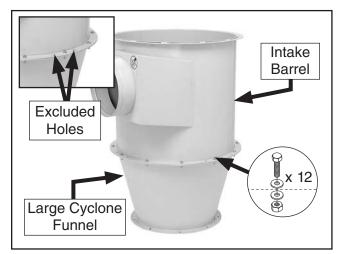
Intake barrel and large cyclone funnel mounting holes aligned.
